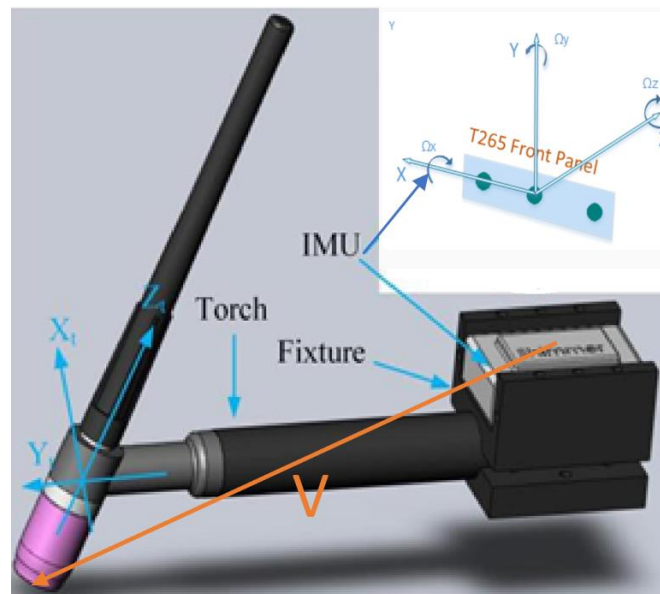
A welding torch equipped with IMU sensor
